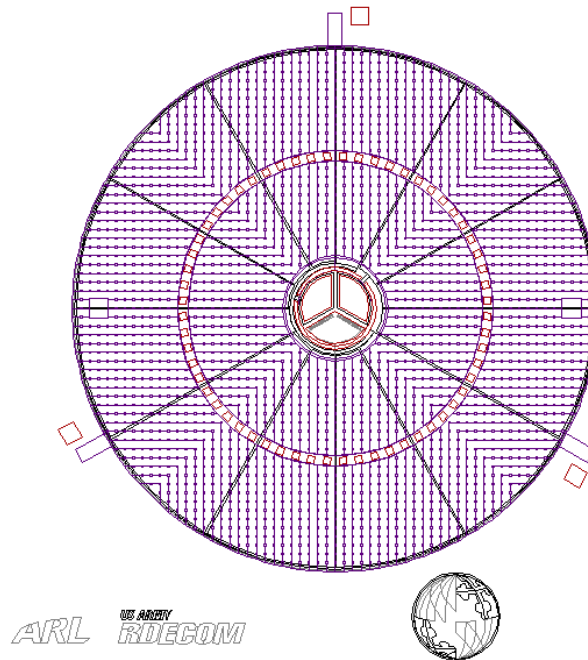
Rotor design using a multi-layer electroplating process to create a rotor with mechanical stops.
